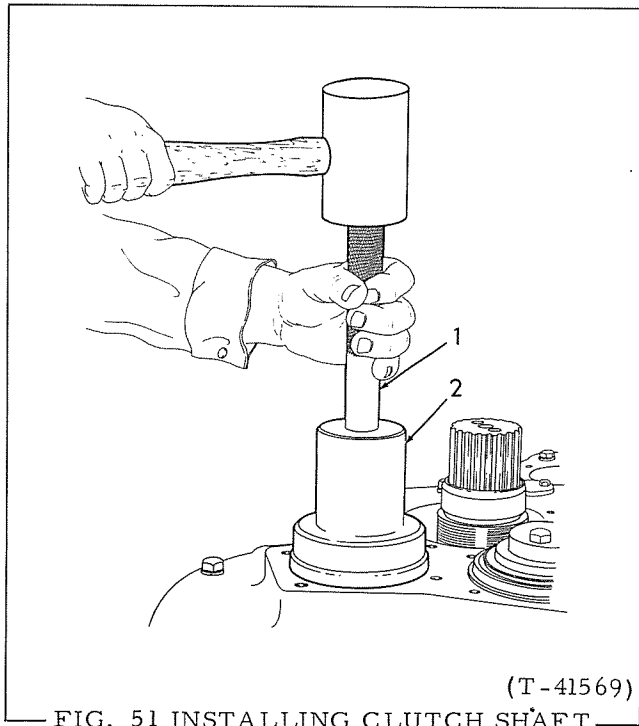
INSTALLING CLUTCH SHAFT FRONT BEARING
